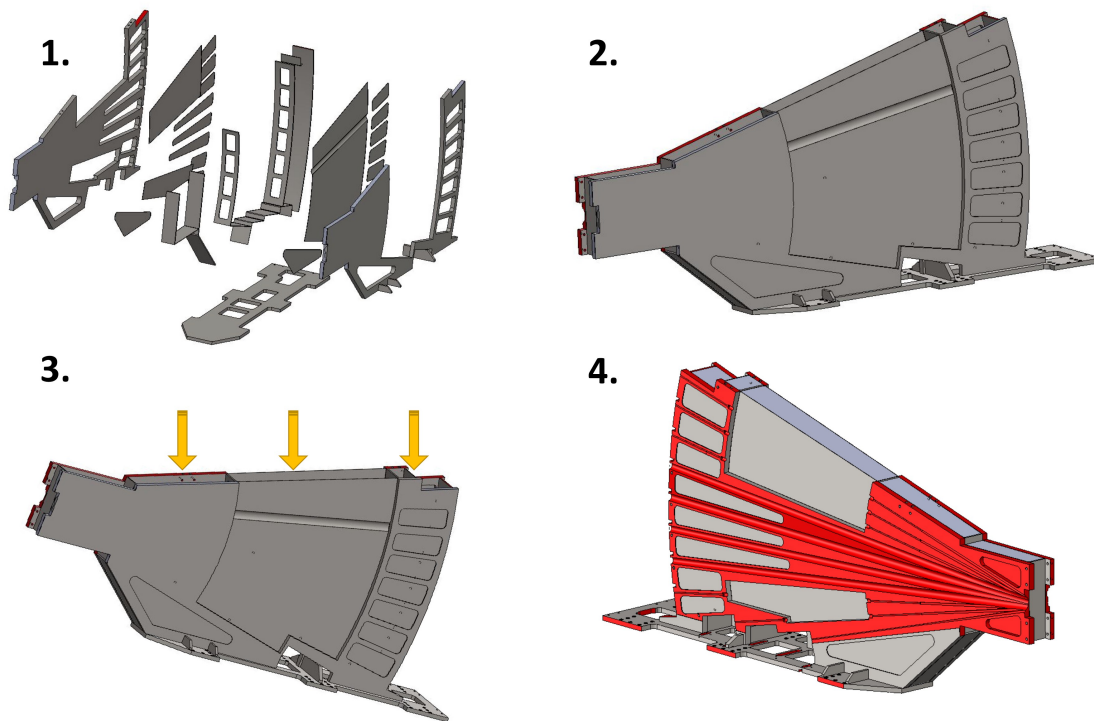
Ex-Port RNC manufacturing preparation (example of the Main center block): 1. Machining, 2. Welding, 3. Pouring, 4. Further machining ([80]).
